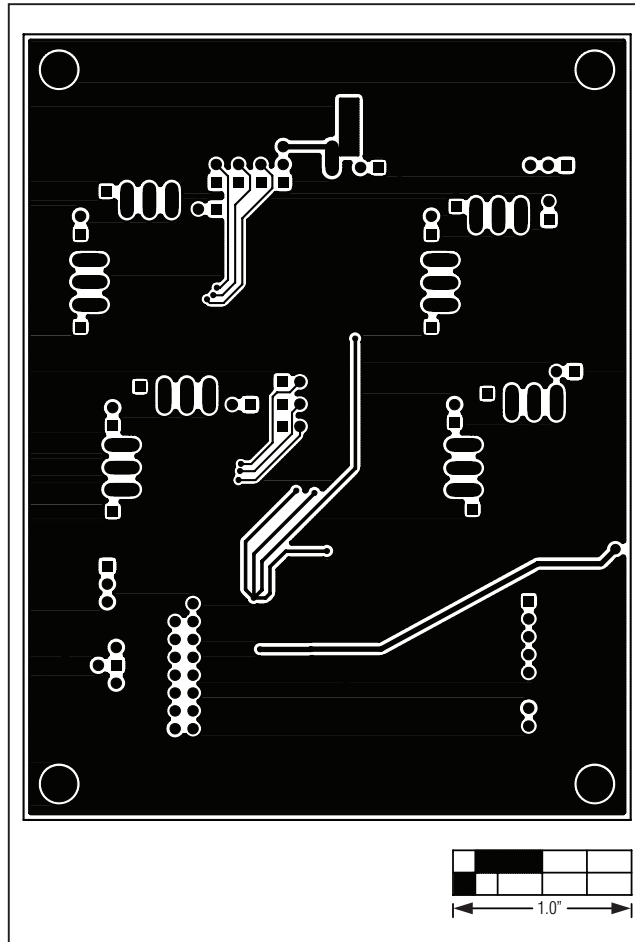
MAX5387 EV Kit PCB Layout—Solder Side
